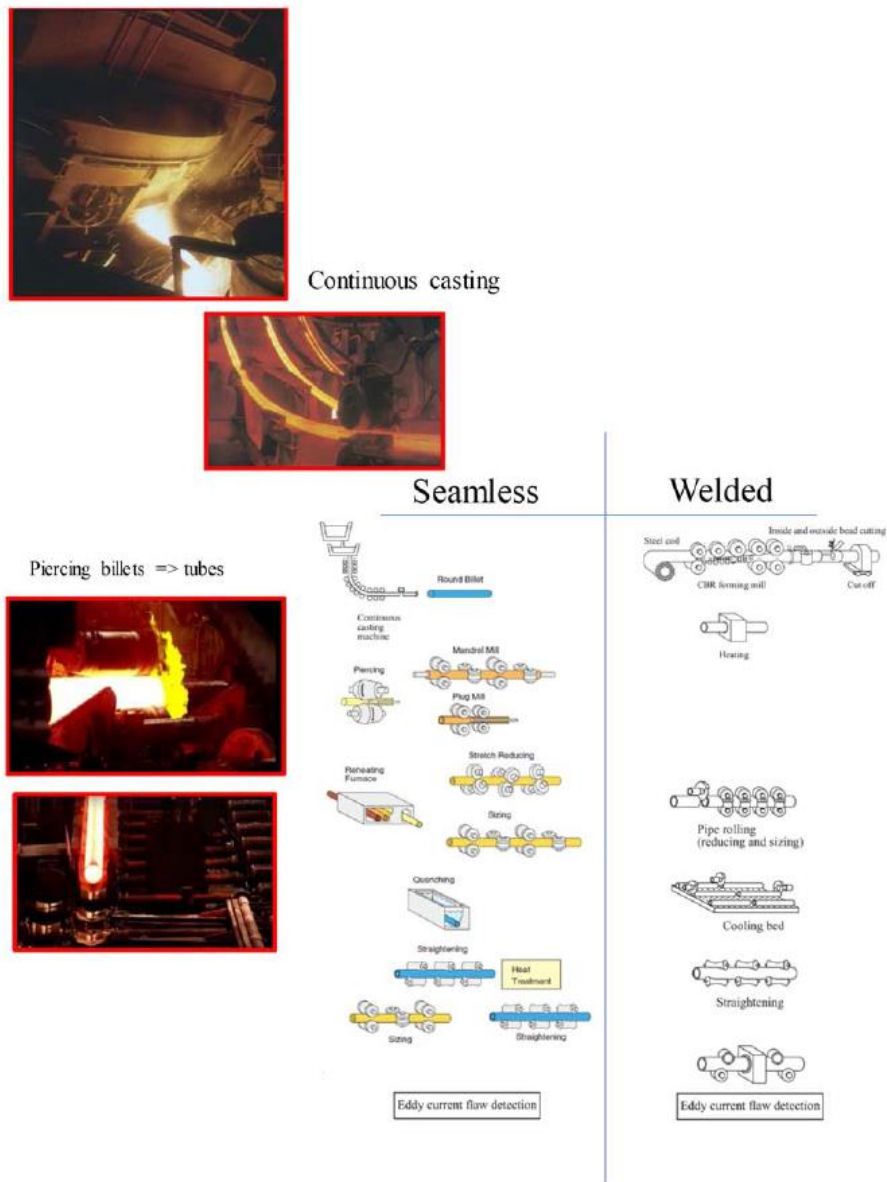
Production process for seamless and welded pipes (Brechan et al. 2018)
